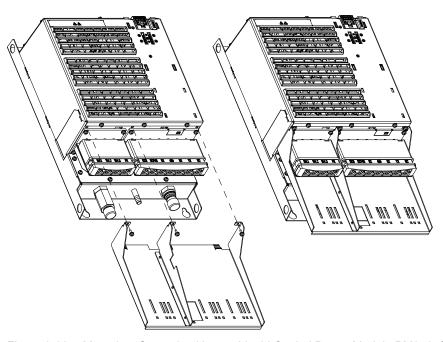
Mounting: Screening kit on a Liquid Cooled Power Module PM340, frame sizes FSD / FSE
